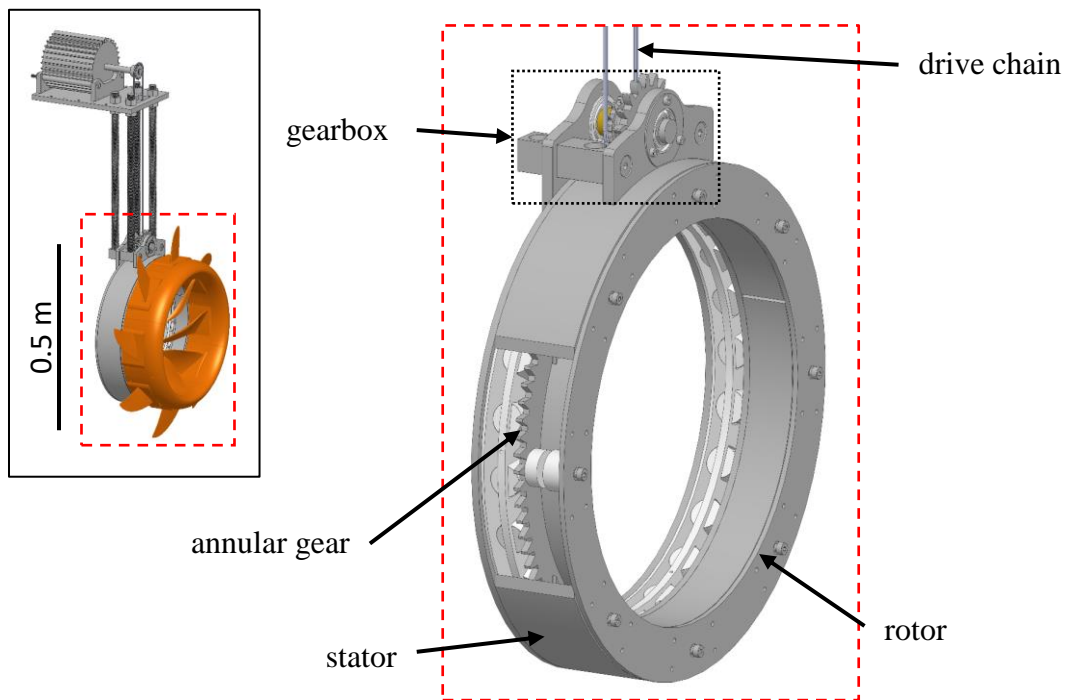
A rendering of key turbine powertrain components with a stator cutaway to show internal gearing.
